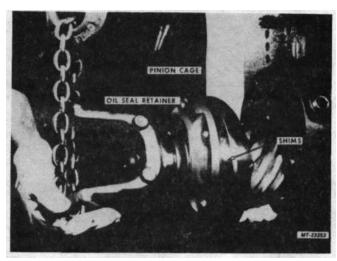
Removing Pinion And Cage (Rear Rear Shown)
